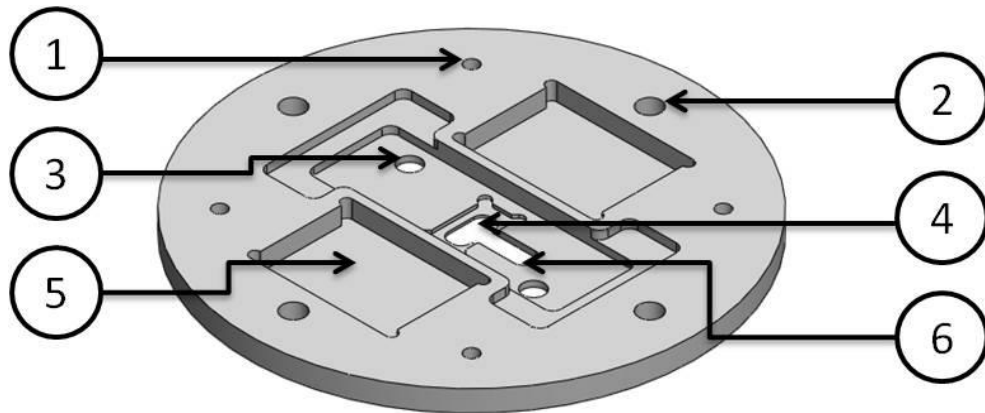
Base Plate. (1) Tapped 10-32 holes to secure upper components to the base. (2) M6 clearance holes to secure base to Newport URS150PP microscope stage. (3) Hole for viewing cells using DIC Microscope. (4) Recessed hole for MSCMA. (5) Magnet holder. (6) Hole to easily remove the MSCMA.
